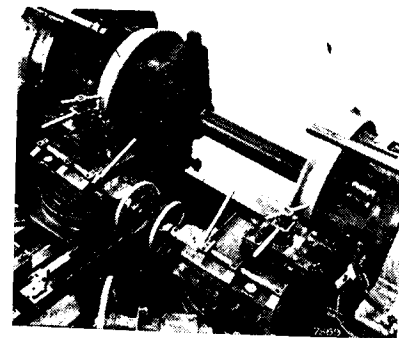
4'-0" Face plate C & W wheel lathe of craven make with turret type tool rests.
